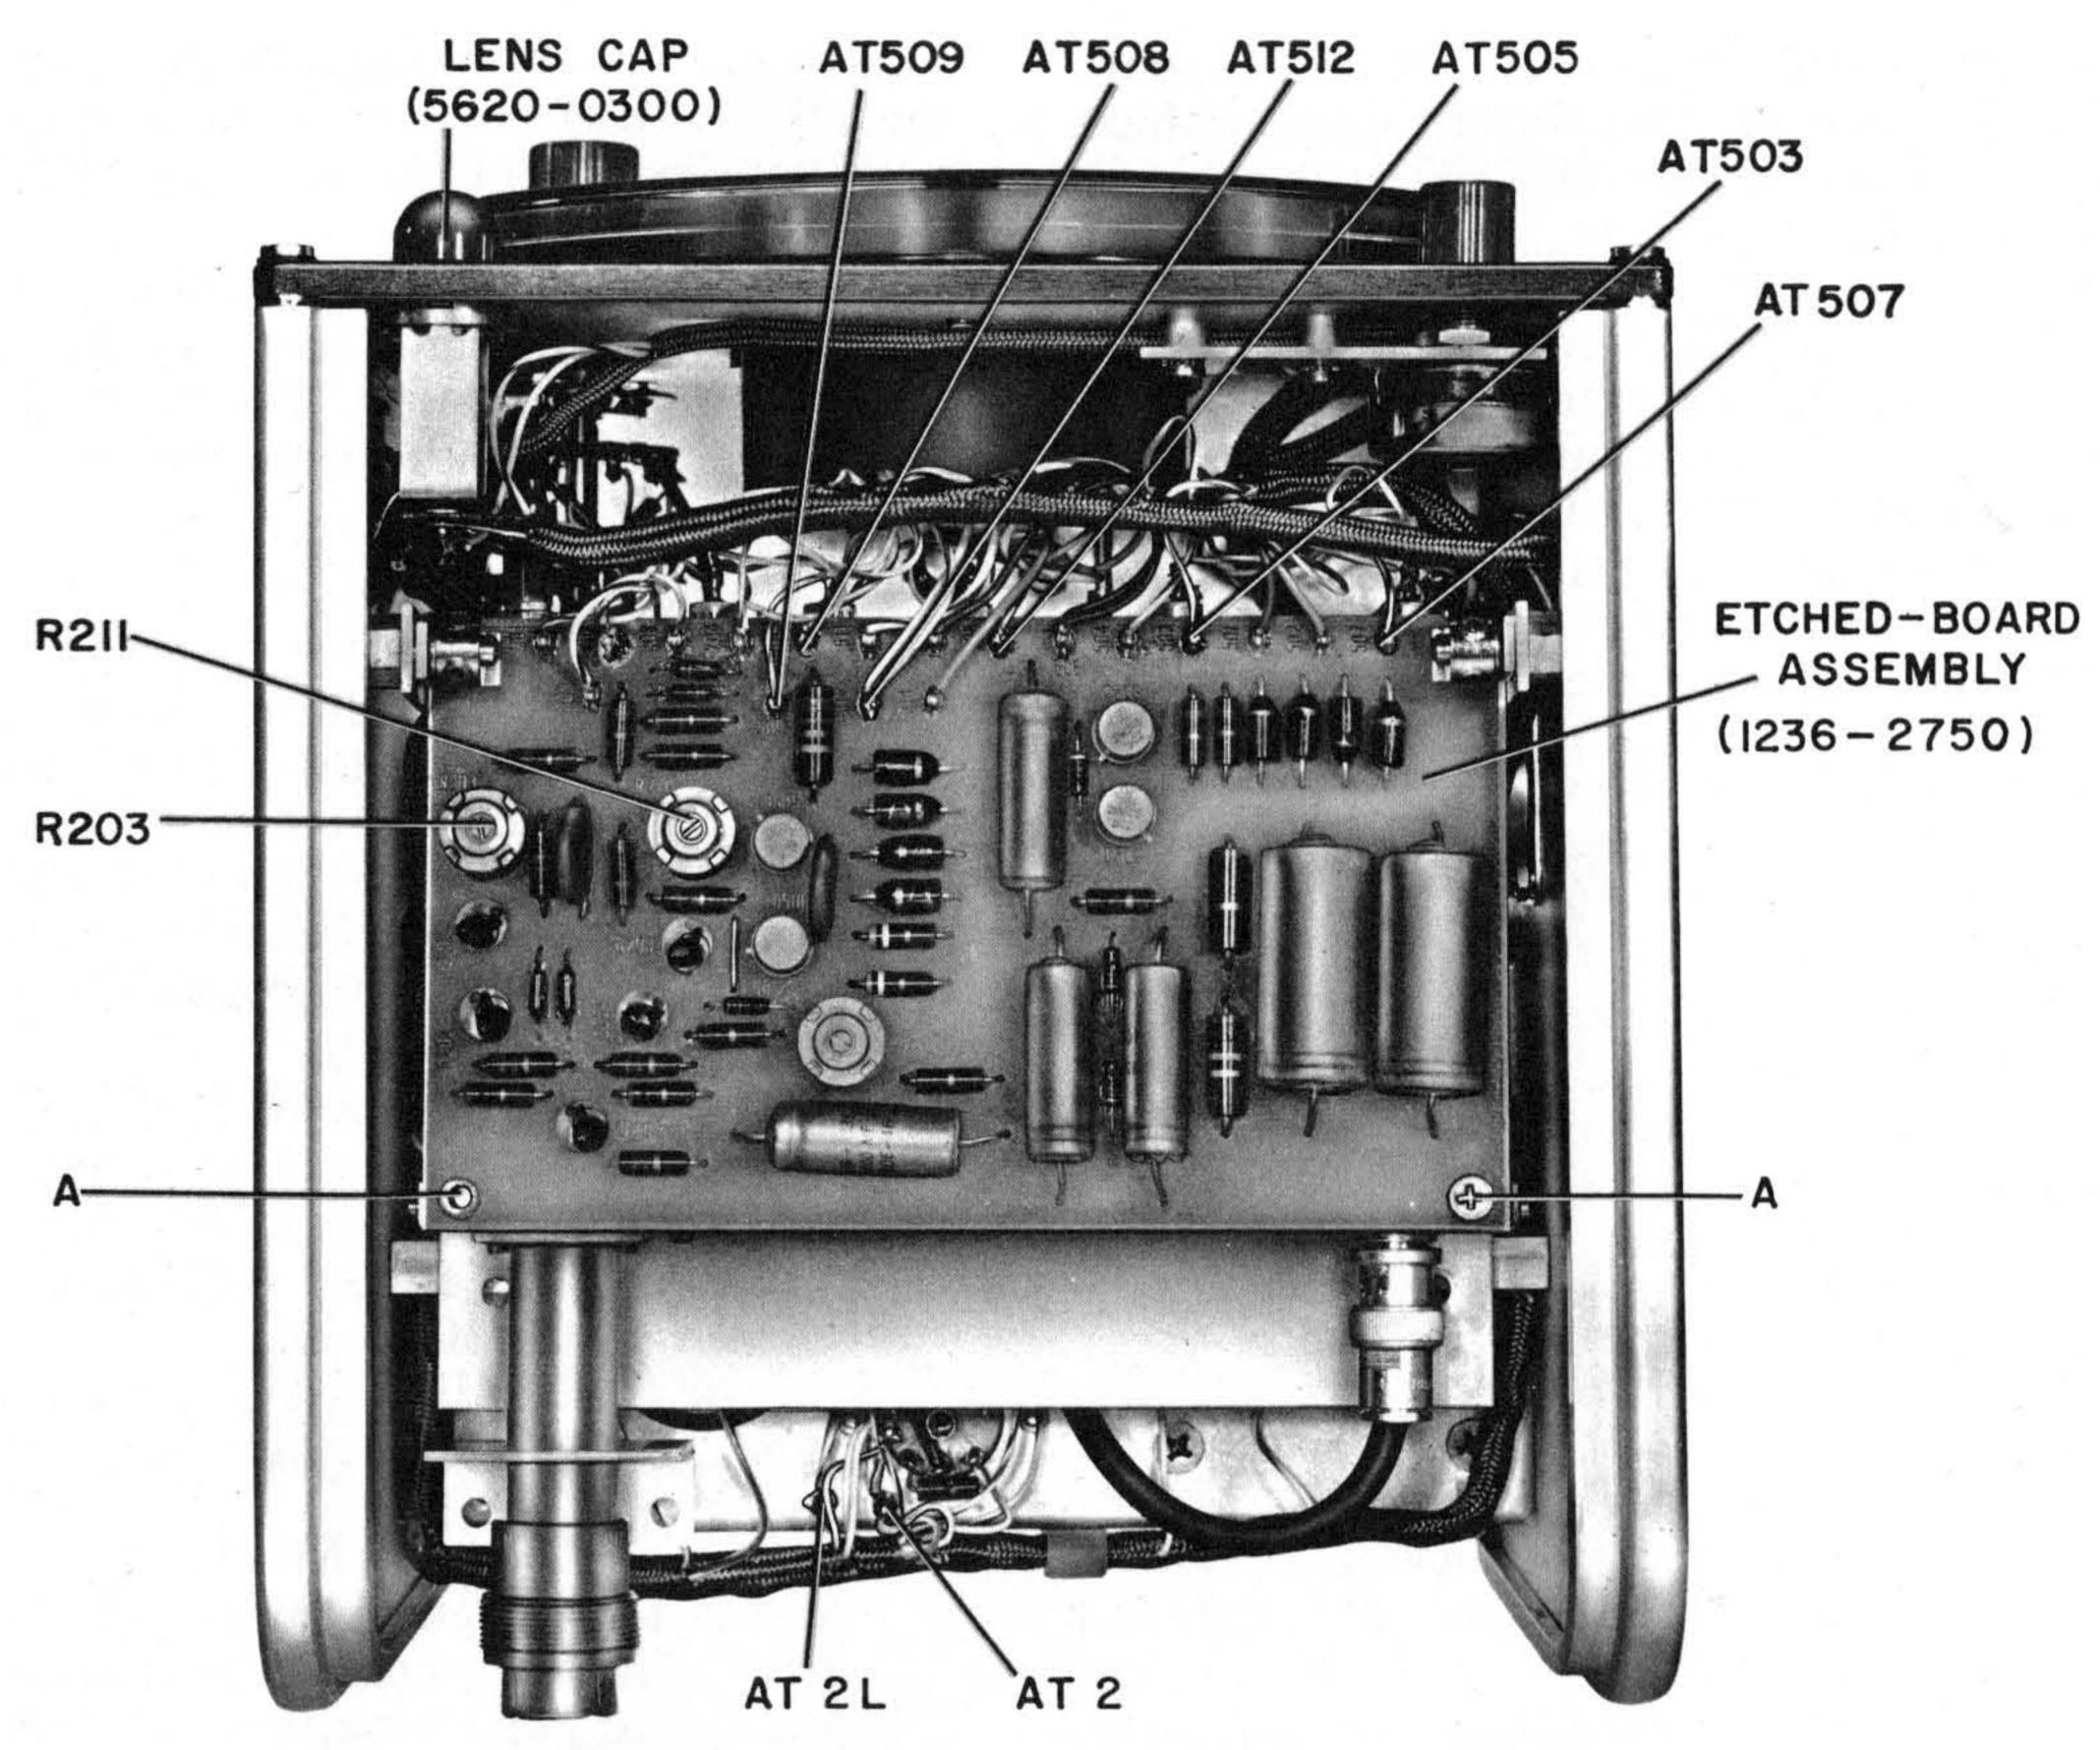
Top view of 1236 with dust cover removed. The etched-board assembly supports power-supply and expansion-amplifier components.
